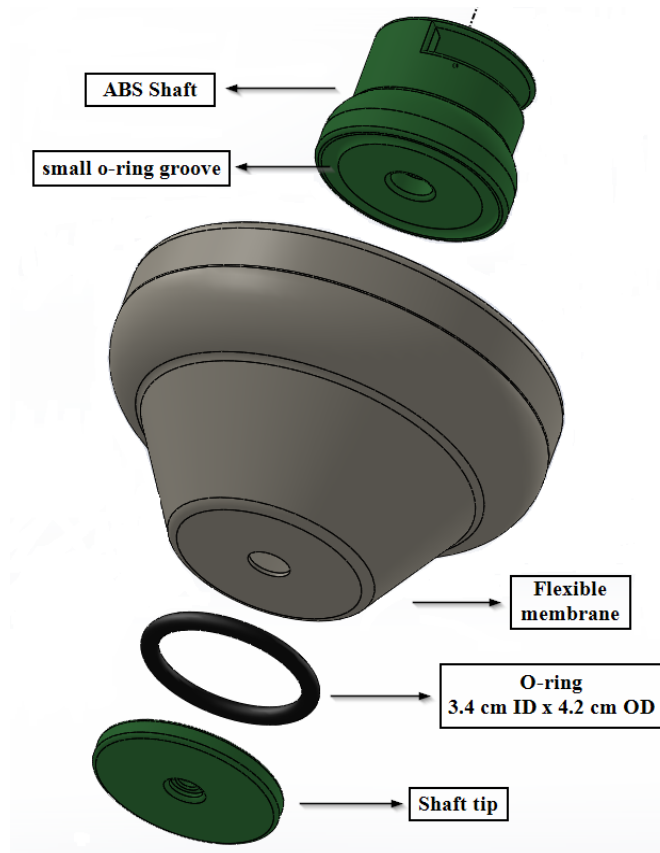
Exploded and isometric view of the gripper in SolidWorks
